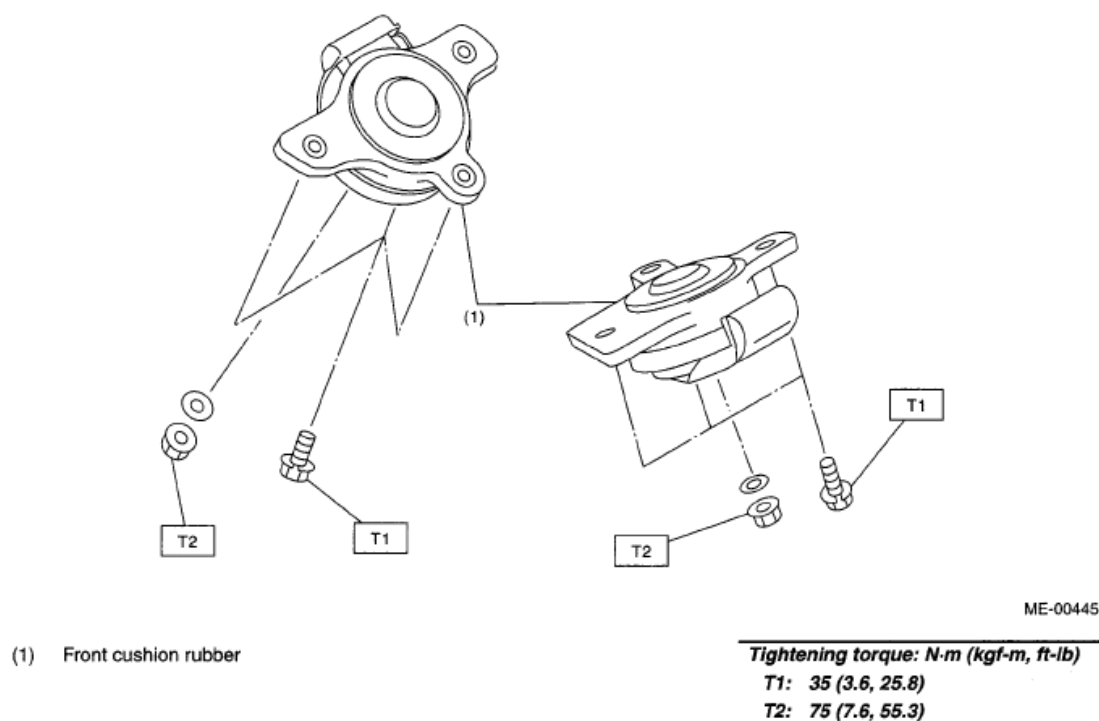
Exploded View Of Engine Mounting Components With Torque Specifications
